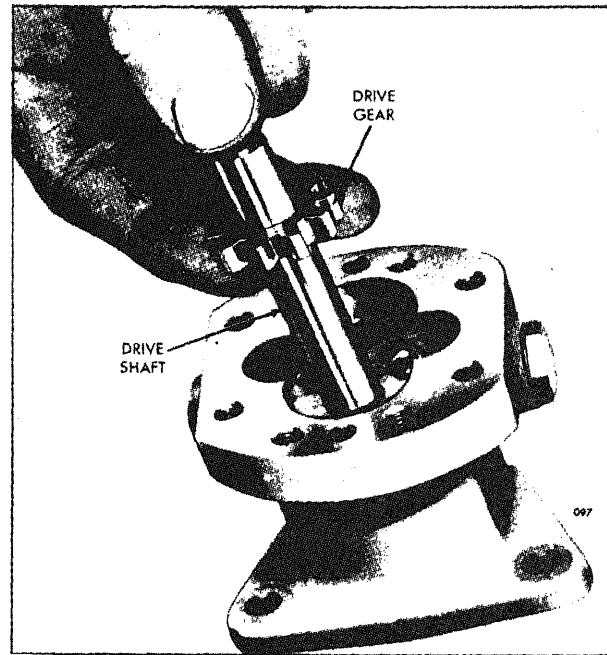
Inserting Fuel Pump Drive Shaft and Gear Assembly through Oil Seals
